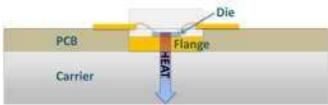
Cross-section view of multi-level part on PCB and carrier
